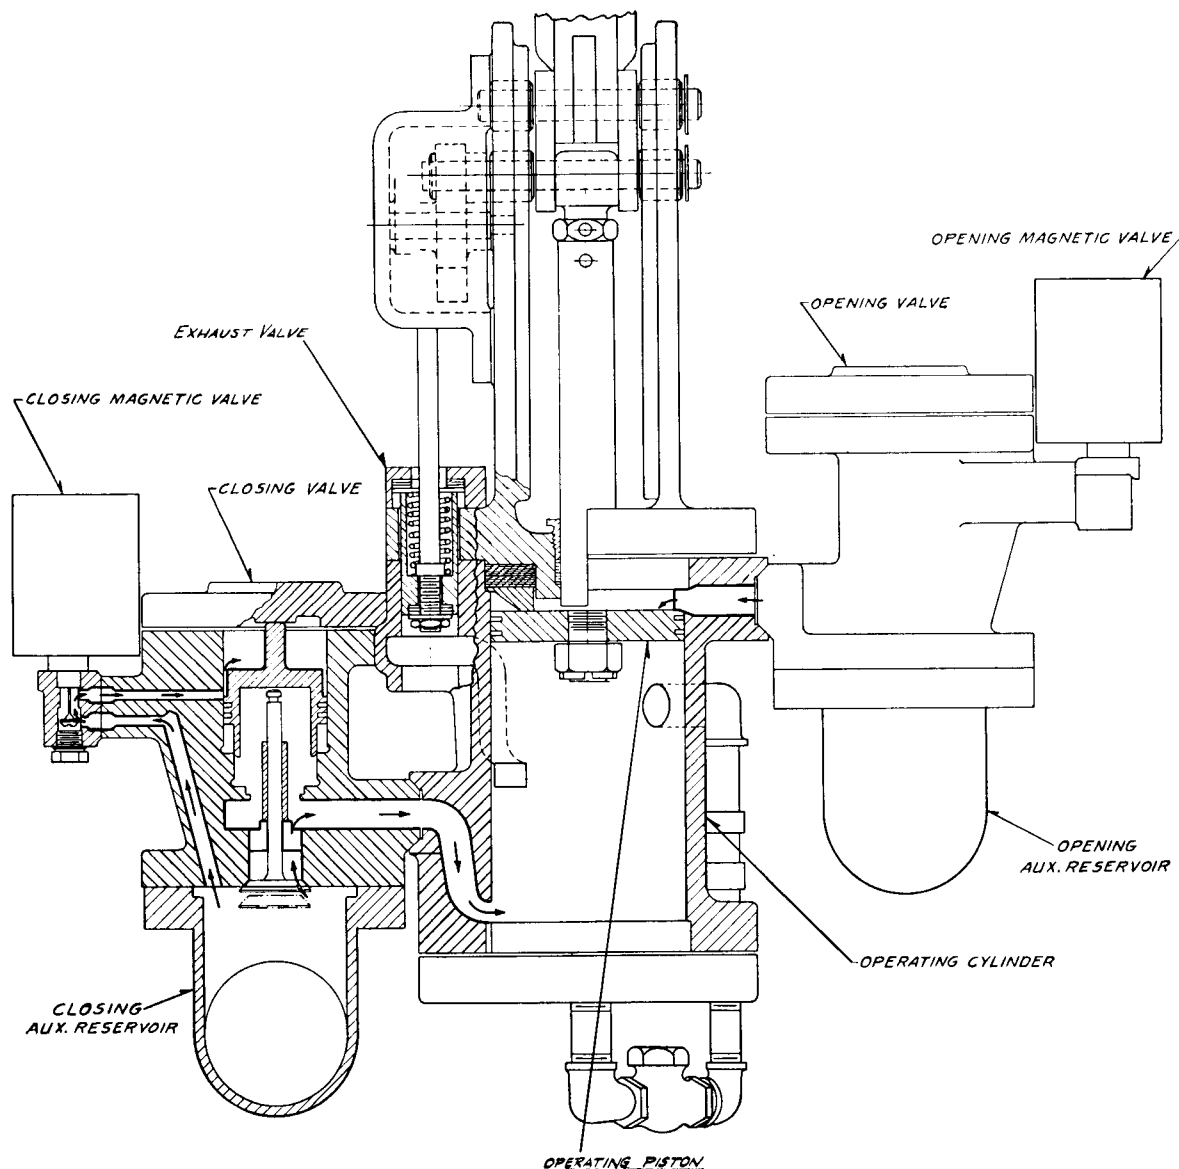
SECTIONAL VIEW OF COMPRESSED AIR OPERATING CYLINDER AND VALVES
